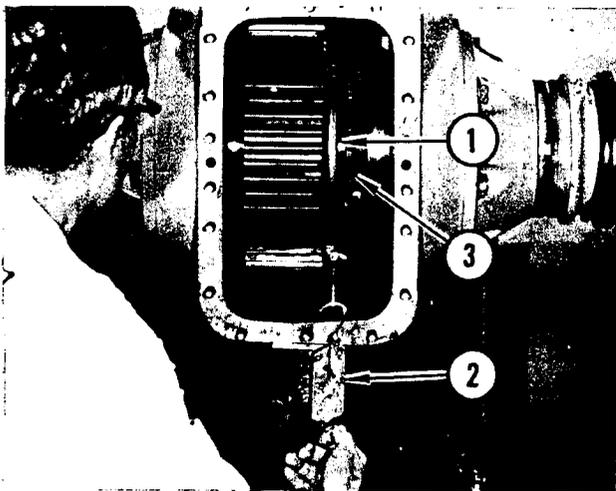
CHECKING BULL GEAR ROLLING TORQUE
